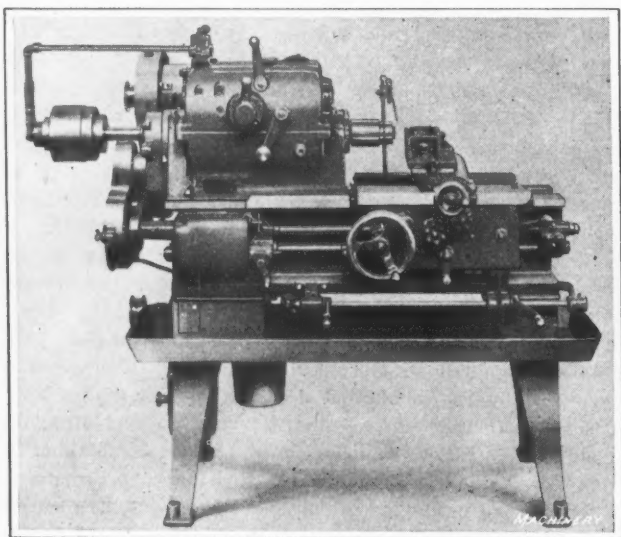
14-inch by 4-foot Geared-head Lathe built by the Springfield Machine Tool Co.
